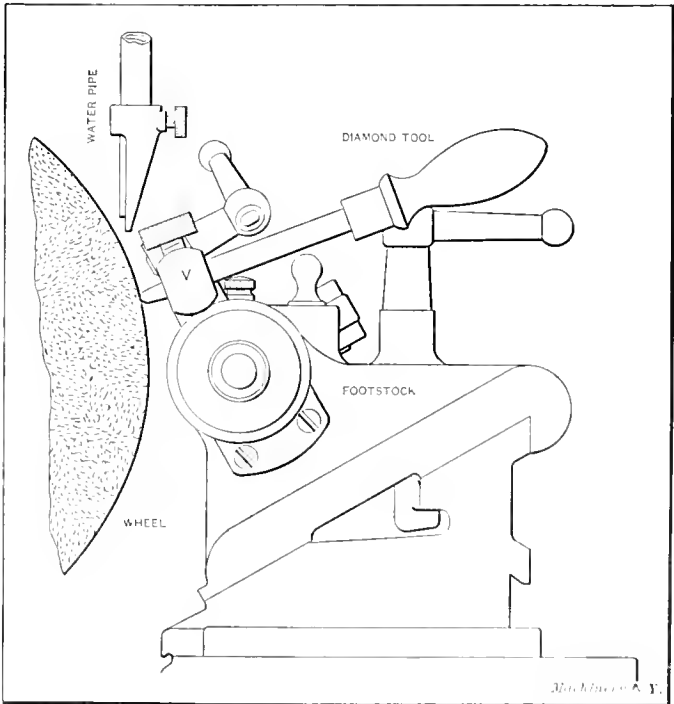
The Way the Diamond Tool should be mounted for Truing the Wheel
